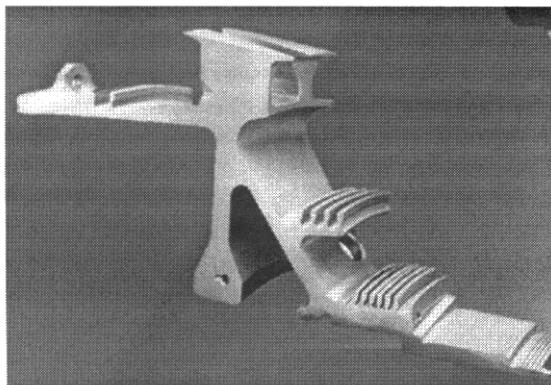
Example of seal teeth repair using the Dabber™ technique (Courtesy of Liburdi Engineering, Hamilton, Ontario).
